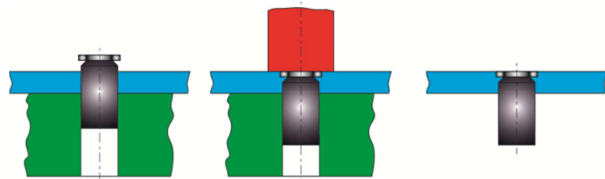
The idea of the fastening a thread fastener in a blind hole
